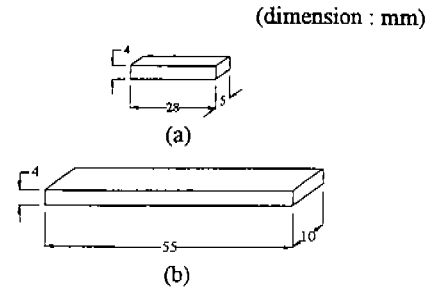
Specimen dimensions: (a) Short beam shear specimen, (b) Charpy specimen.
